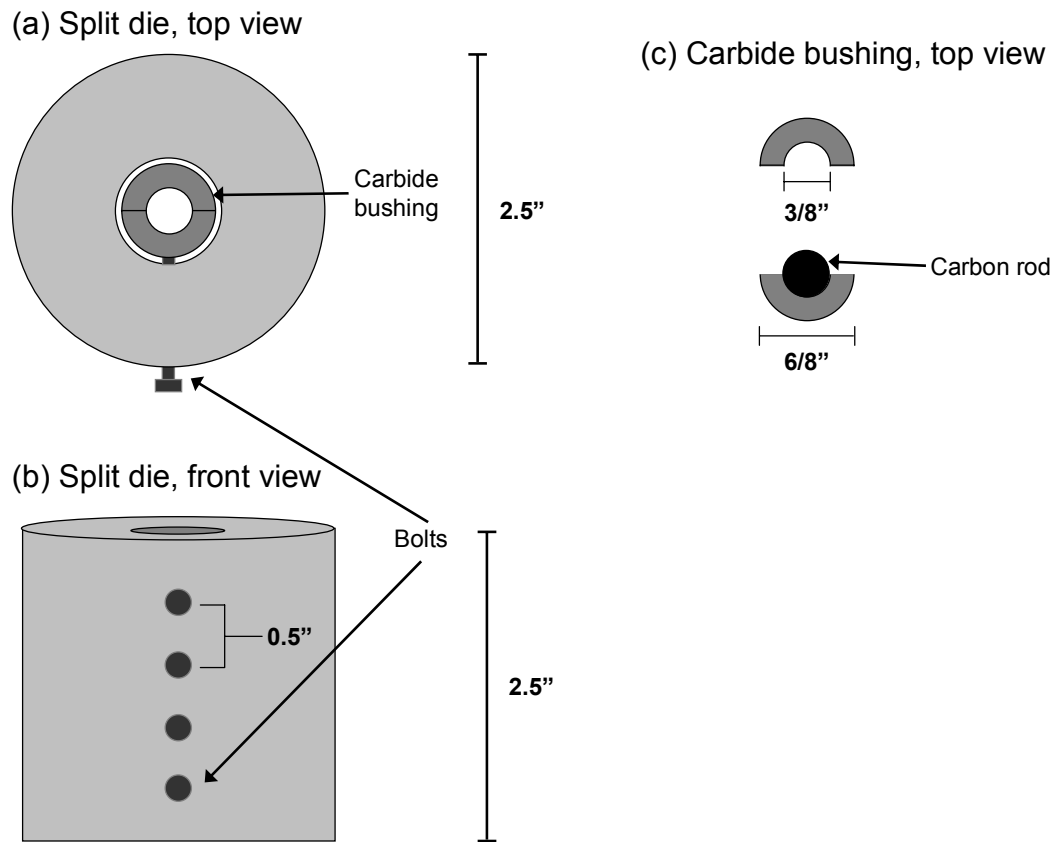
Proposed schematic for the (a) top and (b) front views of the split die. Note the bolts on the front are used to squeeze the carbide bushing together. Because of the small gap between the carbide bushing and the die casing, the bushing will easily slide out from the casing when the bolts are unscrewed. (c) An illustration of how the carbide bushing would be opened to remove a C rod fabricated with high  $^{13}\text{C}$  enrichment without putting excessive stress on the rod.
